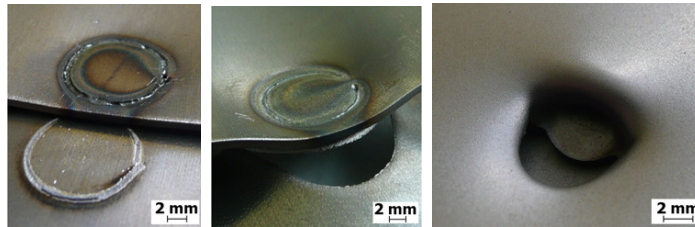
(a) Failure of the circular weld seam, (b) and (c) unbuttoning of the specimen for circular seam and resistance spot
